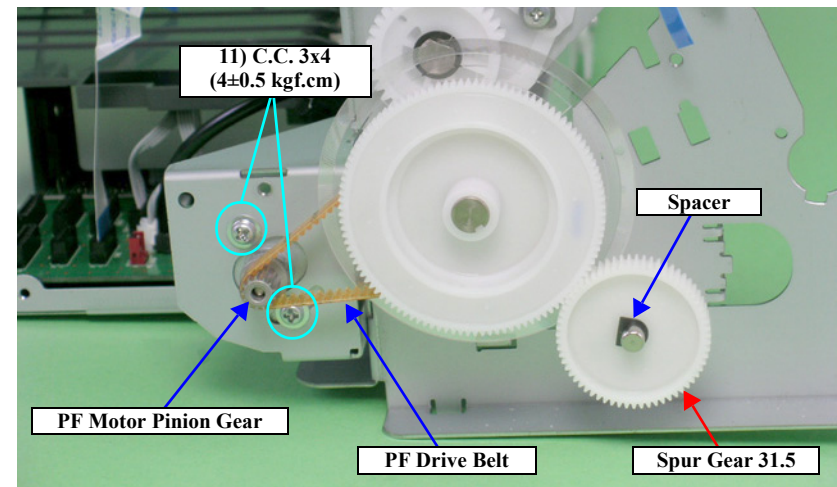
Removing the PF Drive Belt and Spur Gear 31.5
